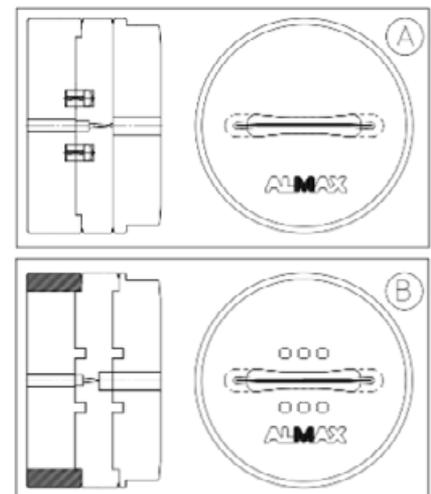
Die designs under investigation showing the front view and vertical cutaway-section. Design A is the benchmark, while Design B is the novel design considered after obtaining the results for the first design.
